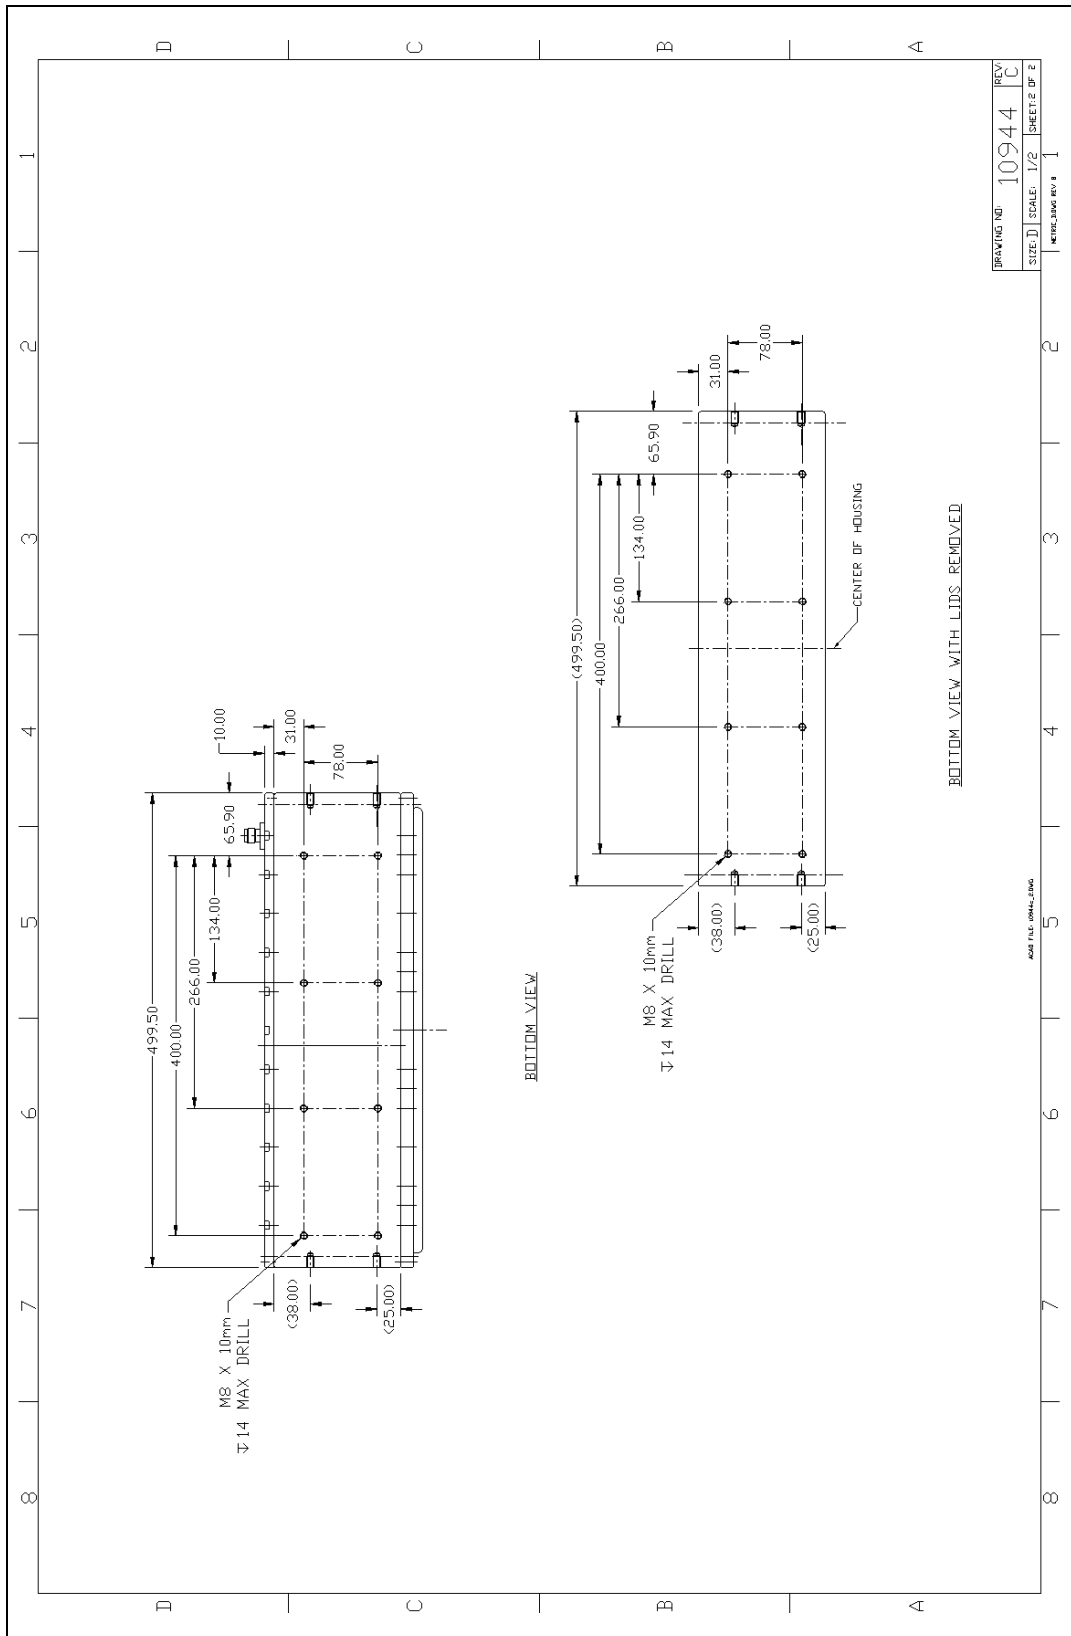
, Interface Control Drawing, 8125/8128, Sheet 2
